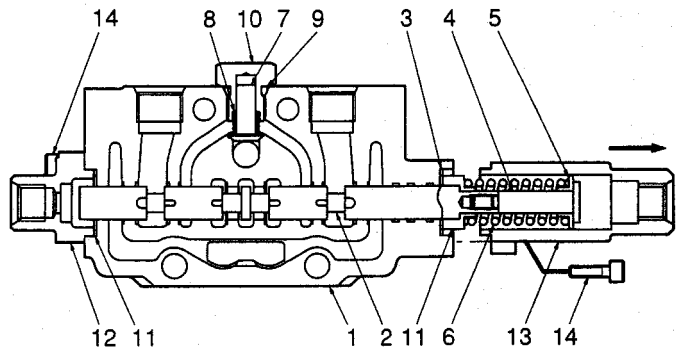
Slewing spool (hydraulic pilot changeover type)
